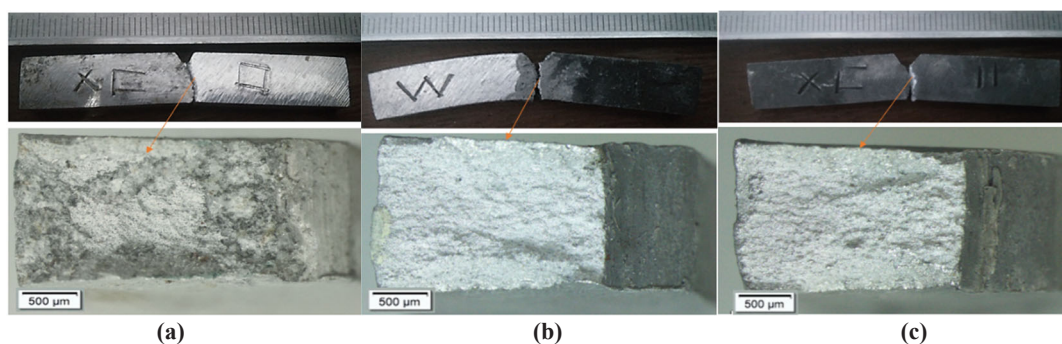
Surface fracture of impact test specimen with the notch in weld metal: a) T0, b) T6B, c) T6C
